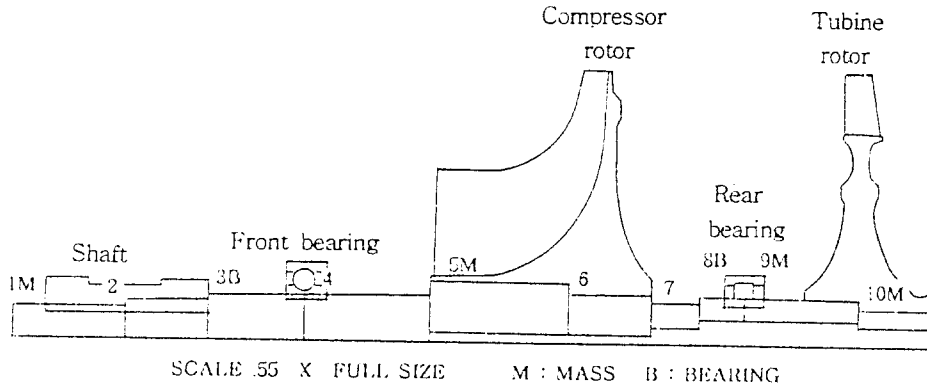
Turbin rotor disk configuration of model 300 turbojet engine
